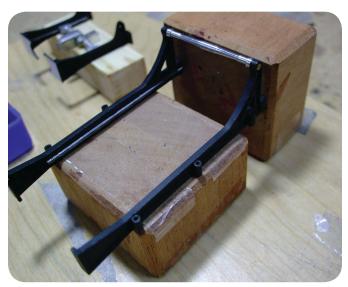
The support structure on which ran the two outer bearings of the crosshead assembly.
